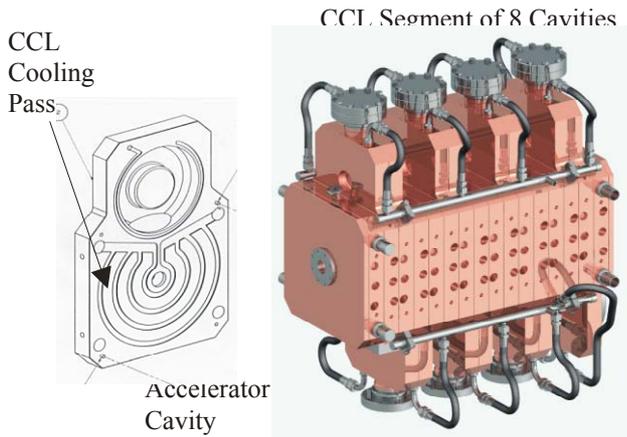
A CCL 8-cell segment with exploded view of the cooling passages
